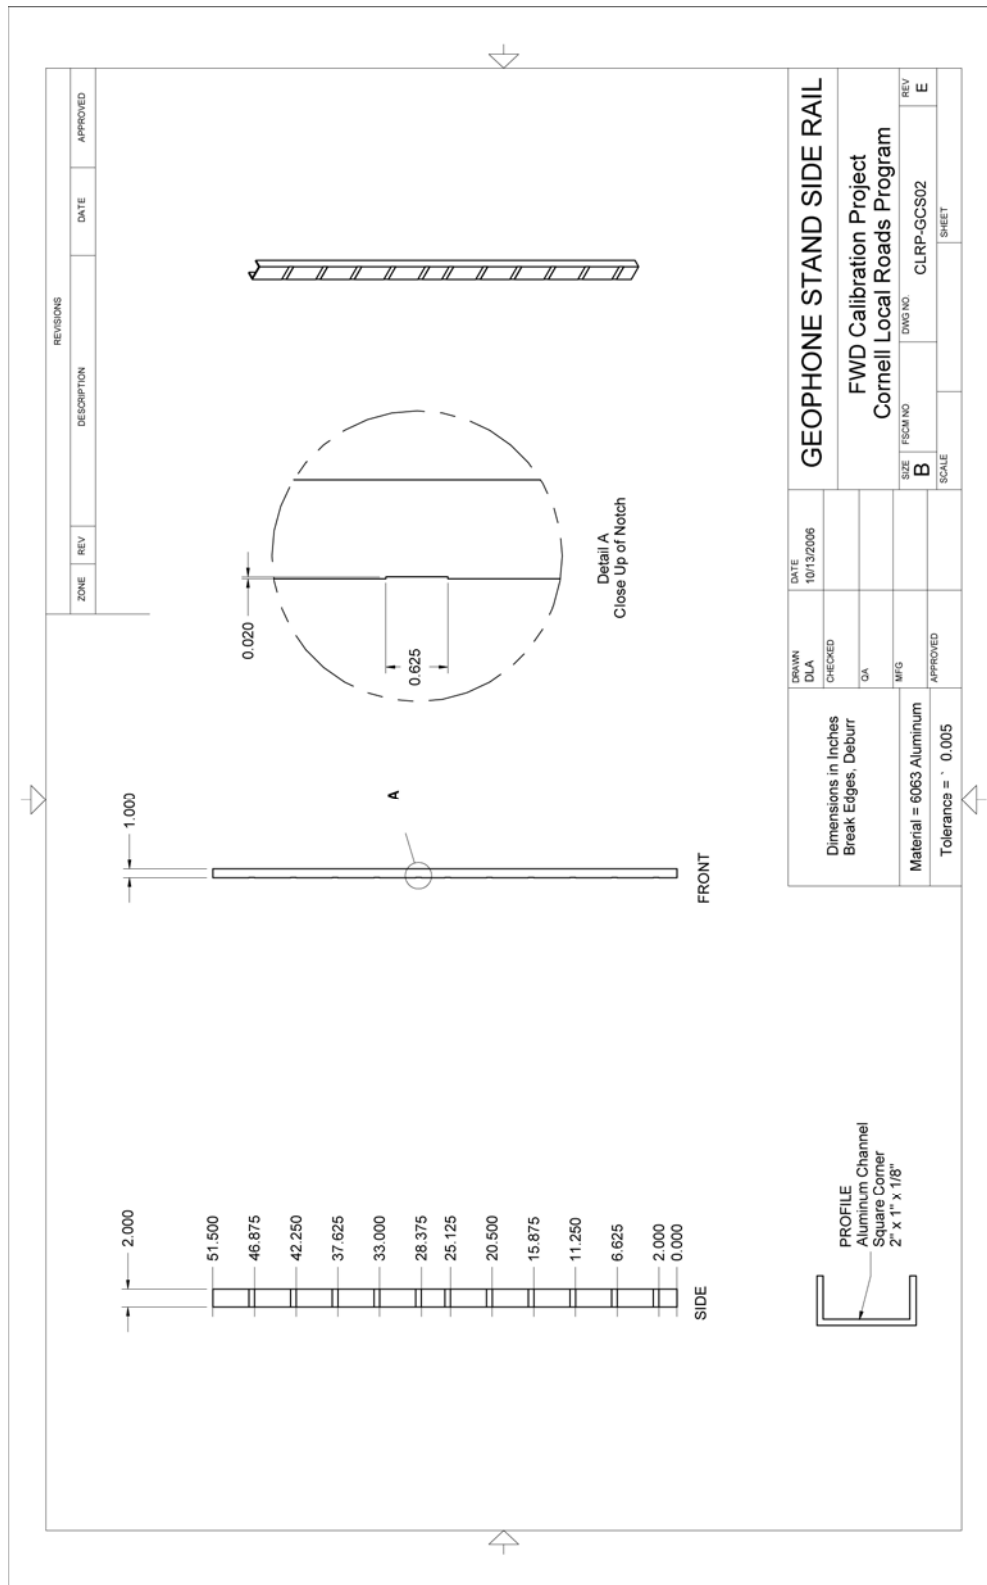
Drawing. CLRP-GCS02 Geophone Stand Side Rail.
